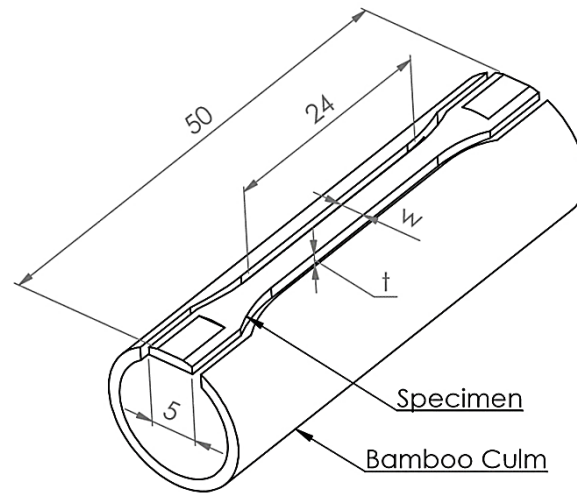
Sample geometry and principal dimensions (dimensions in millimetres).
